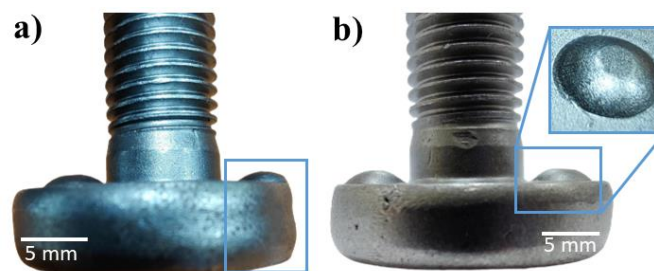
a) bolt's centring defect; b) bolt's bump flatten defect.
